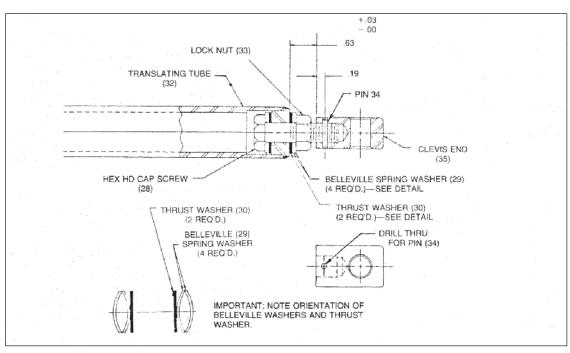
SLIP CLUTCH ASSEMBLY
